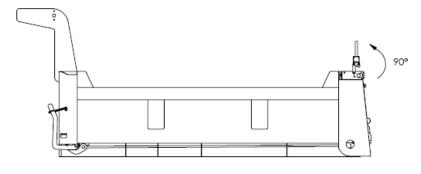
ROTATE TOP LATCH HANDLE UP
